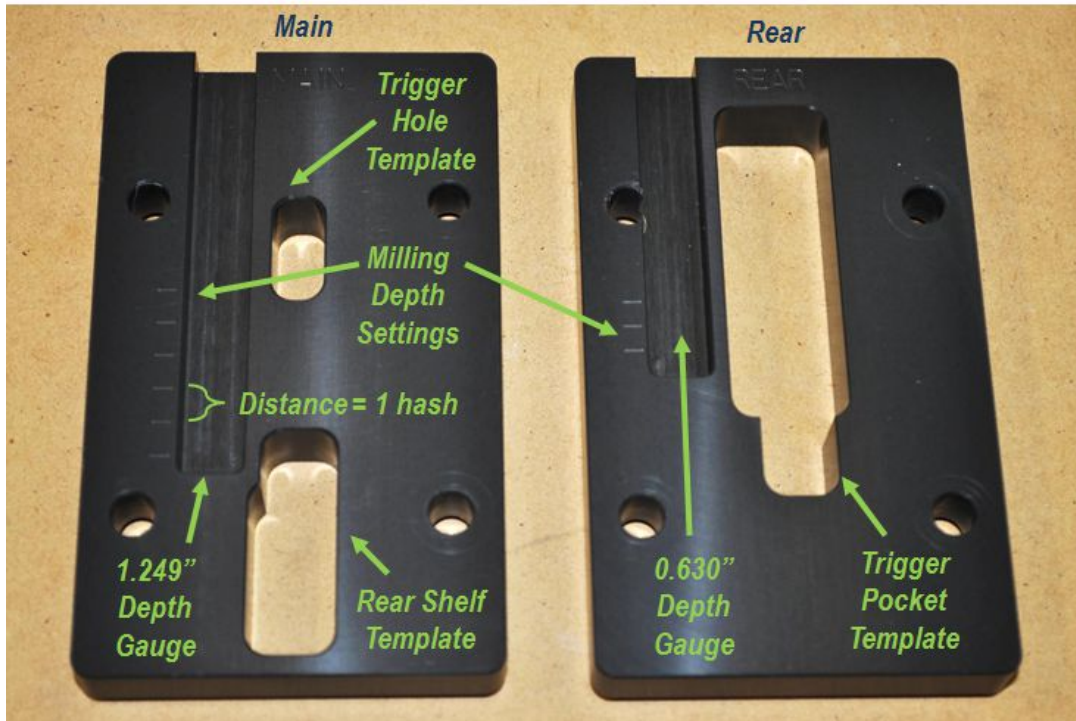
Templates are used to control the dimension of the required milled features. The depth gauge allows fast and simple setup and verification of the drill and end-mill depth. The hash marks are used to control the amount of material removed in one pass. The distance between two hash marks is referenced as the “hash”
